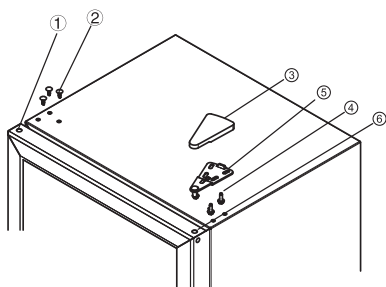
Reversing the door: Steps 1, 2 & 3.
